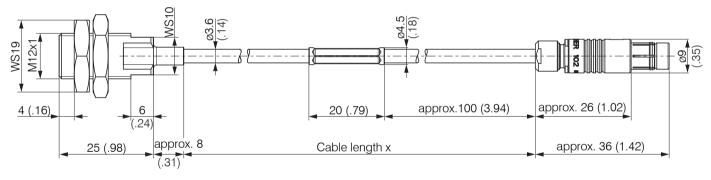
Dimensional drawing sensors ES-S2-C-CAx/mB0, dimensions in mm (inches)
